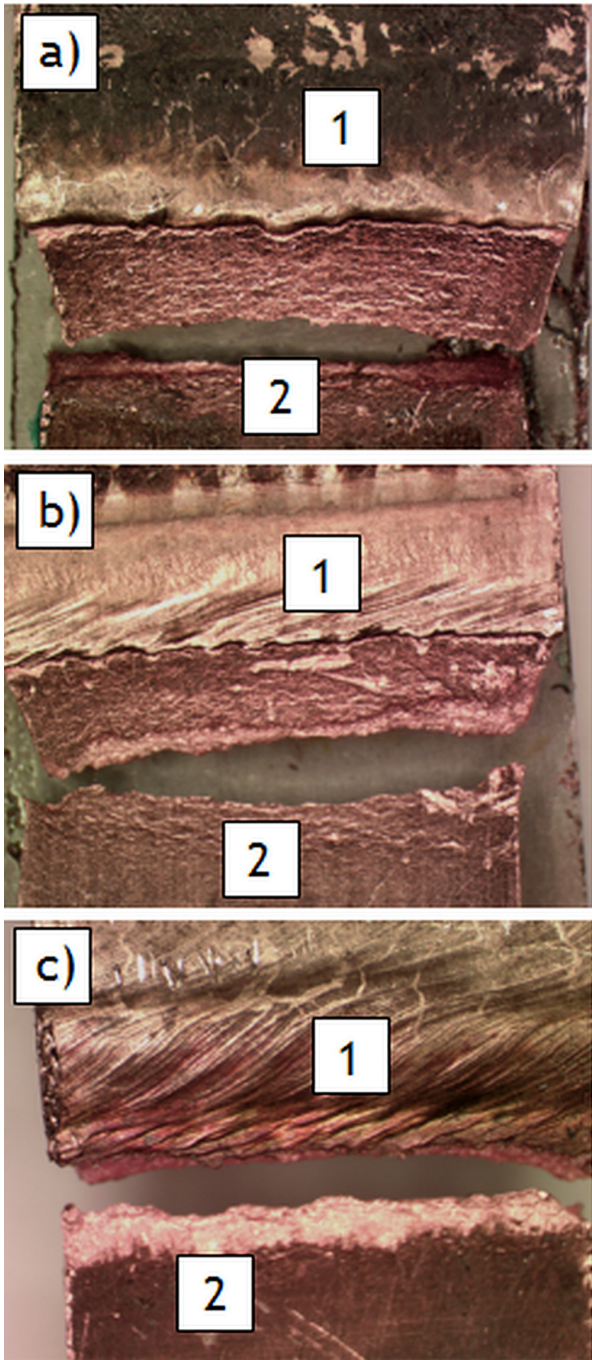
Examples of breakthroughs of austenitic steel brazewelded joints with copper: a joint in a steel – copper system in helium shield (a), joints in a copper – steel system in argon (b) and helium (c) shield; 1 – brazeweld, 2 – copper Cu-ETP
